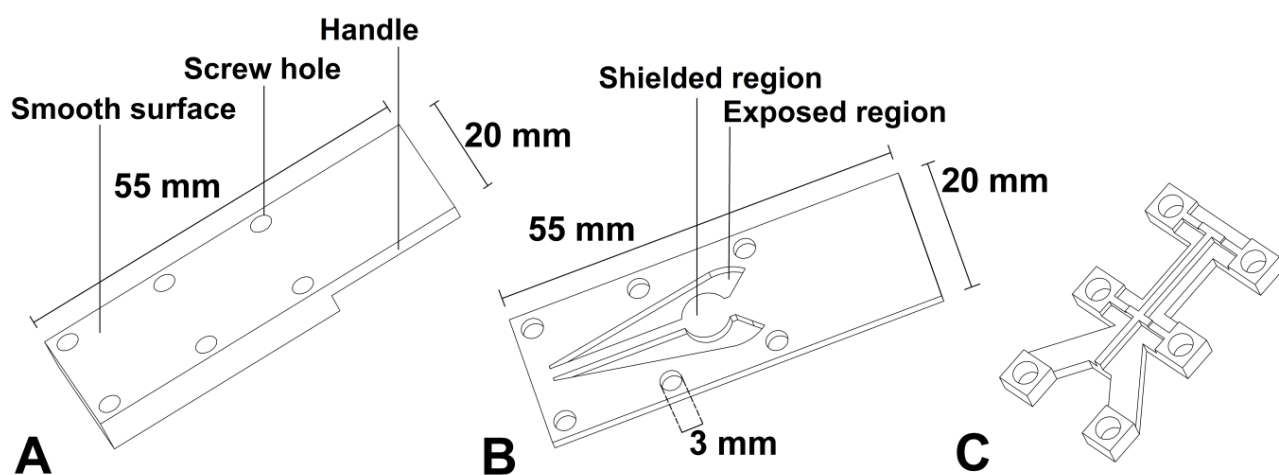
SolidWorks drawings for the parts used in the 3D-printed tool made for patterning paper analytical devices with the wax-dipping approach. (A) The flat base with screw holes on to which the paper to be patterned is placed; (B) this drawing shows the 3D-printed mask with openings through which molten wax can contact the paper, making it hydrophobic; (C) structure with screw holes to apply additional pressure on the mask in the center.
